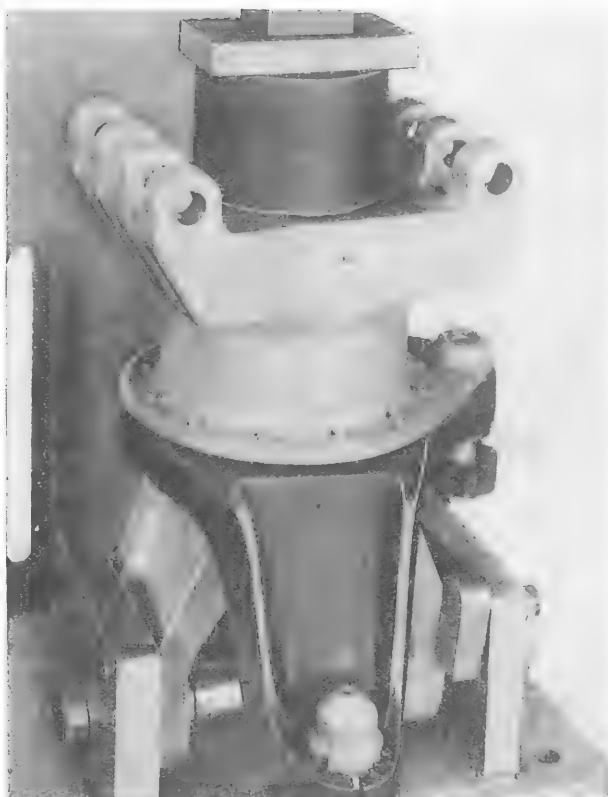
Removing Cap Nut from Trunnion Assembly on Horn
